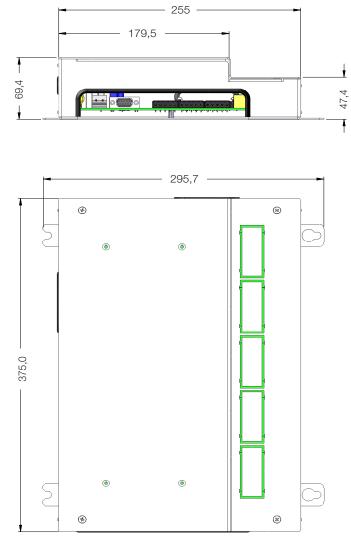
Dimensions of the IFSC board metal enclosure (mm)
